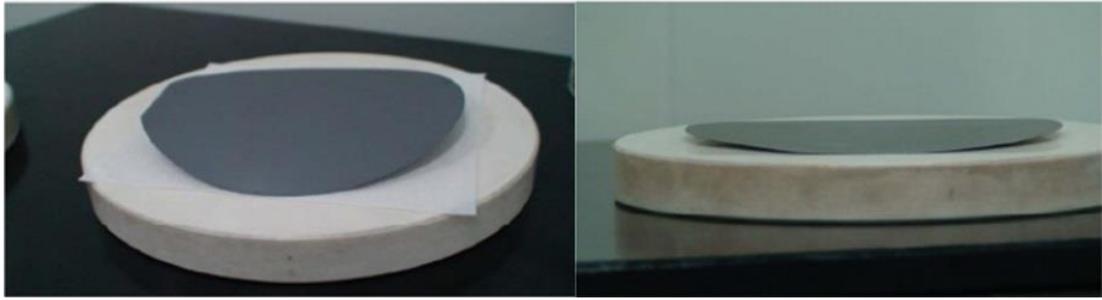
Picture of wafer warpage after mechanical grinding. Caused by near surface damage [13].
